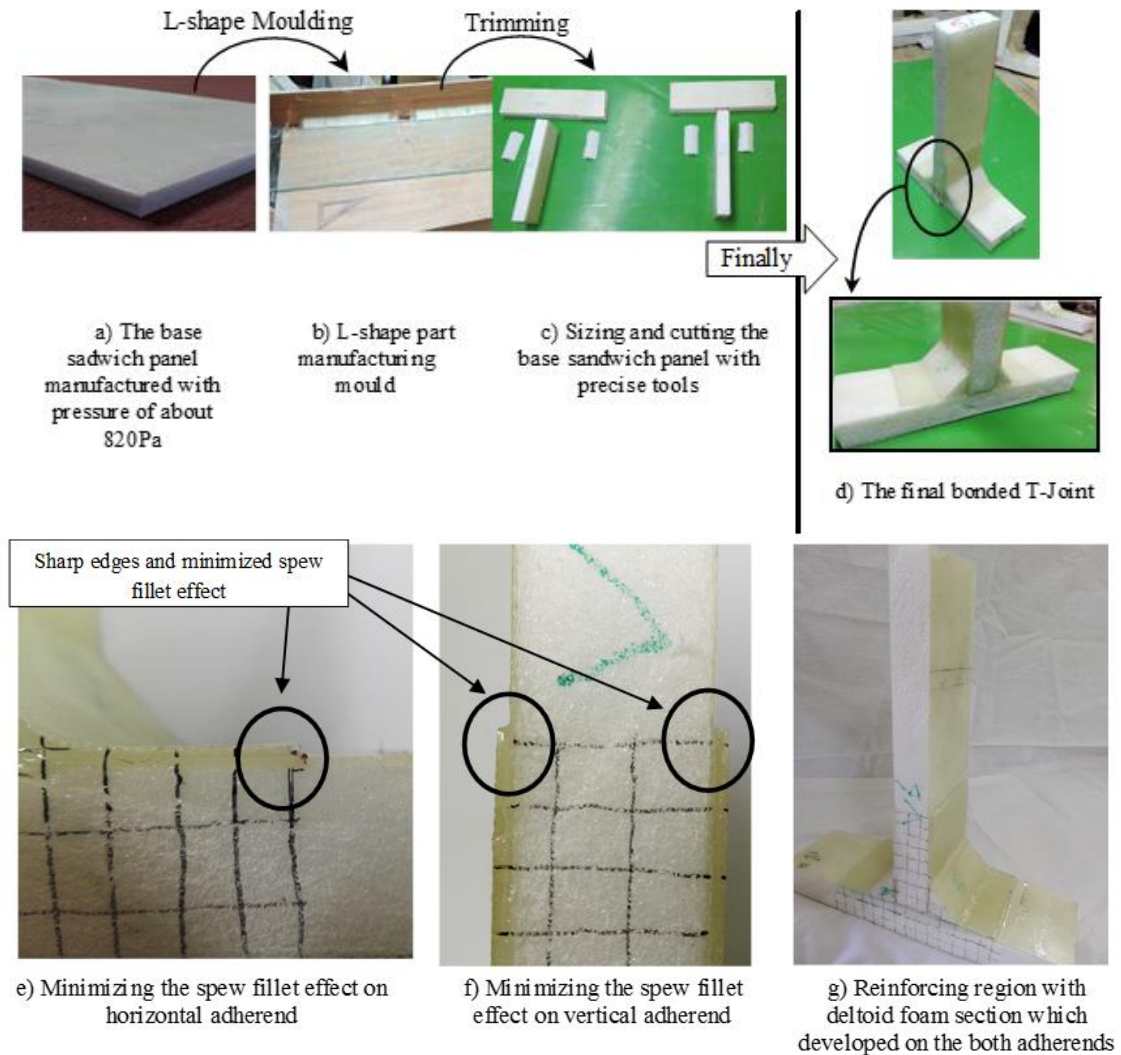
Manufacturing process and details of the T-joint specimens for modal test
